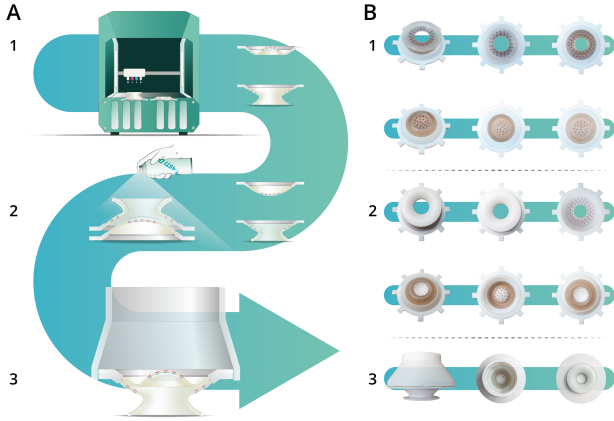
(A) Manufacturing steps. (A1) Fabrication of top and bottom parts by polyjet additive manufacturing with the Stratasys J35, (A2) Spraying Plasti-Dip onto the highlighted parts, (A3) Bonding the top and bottom and attaching them to a PLA 3D-printed mount. (B) Pictures in different stages of the process. (B1) Top and bottom parts before application of Plasti-Dip and (B2) after application of Plasti-Dip. (B3) Assembled module consisting of top part, bottom part, and PLA 3D-printed mount
